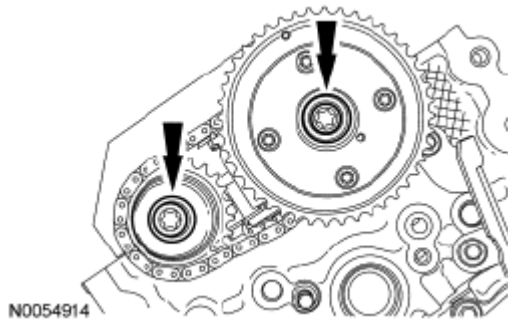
Locating VCT Assembly Bolt & RH Exhaust Camshaft Sprocket Bolt
